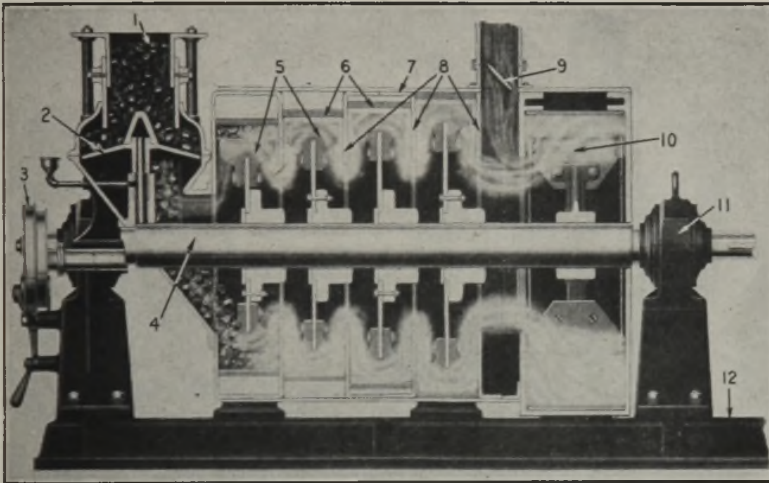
Diagrammatic cross section of the Aero-unit pulverizer. (1) Coal inlet. (2) Rotating feed table. (3) Drive for feed mechanism. (4) Extra-heavy alloy-steel shaft. (5) Alloy-steel paddles. (6) Alloy-steel liners. (7) Steel plate casing. (8) Steel diaphragms. (9) Adjustable air intake damper. (10) Fan. (11) Self-aligning double roller bearings. (12) Bed plate.
